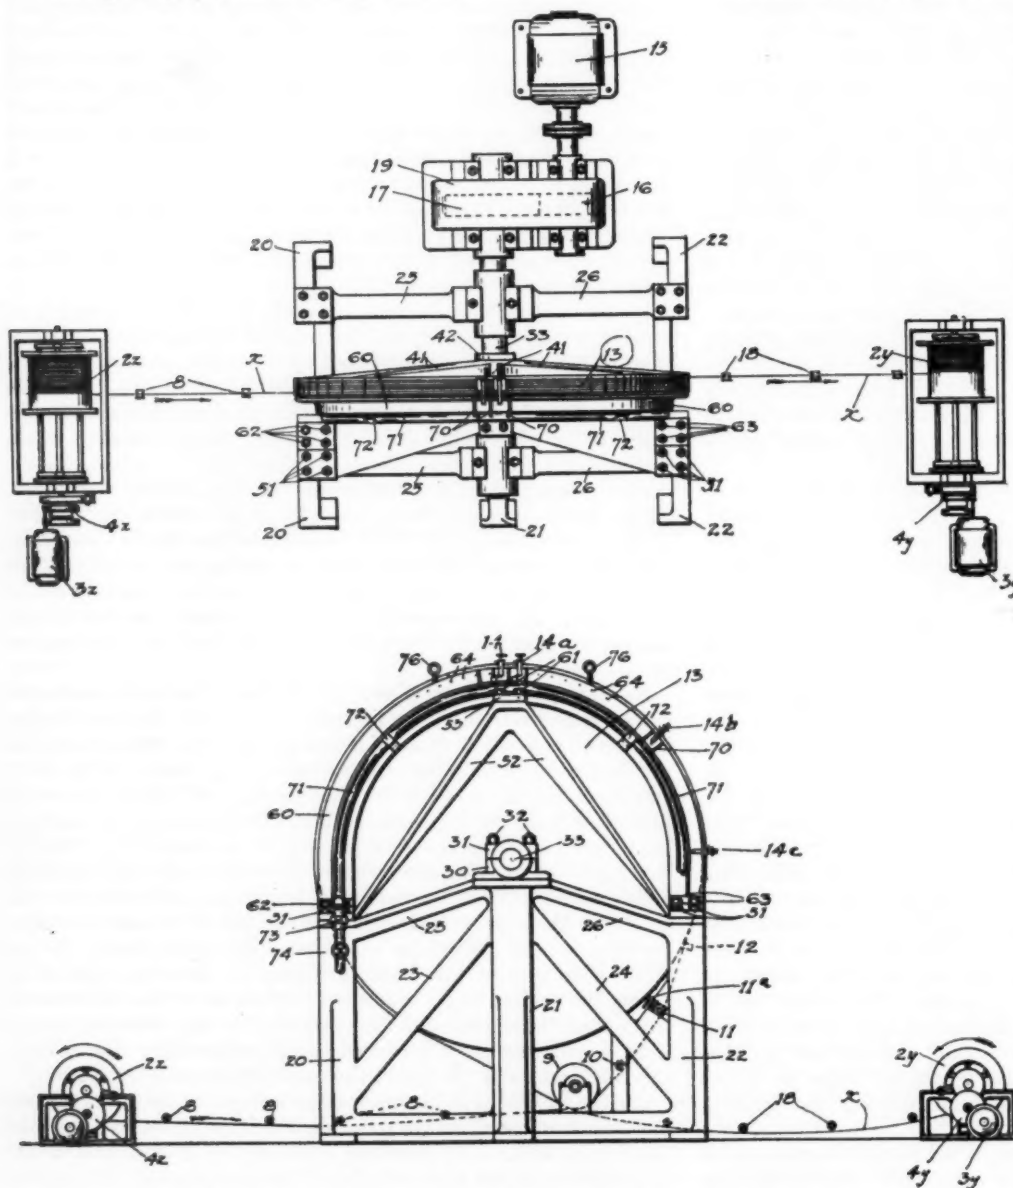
PLAN AND ELEVATION OF BRILLO-FIELD SINGLE-UNIT MACHINE
